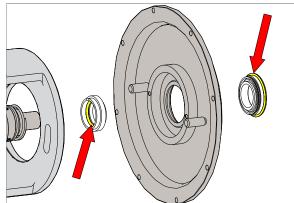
Degrease the motor shaft and pump shaft before assembly.
